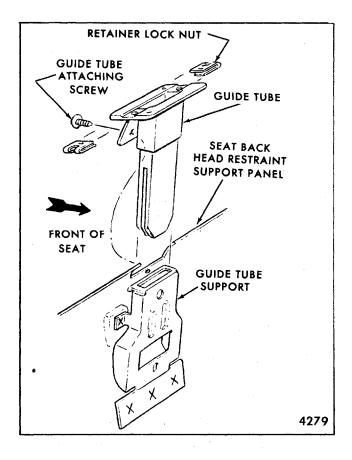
Head Restraint Guide Tube - E and X Styles
